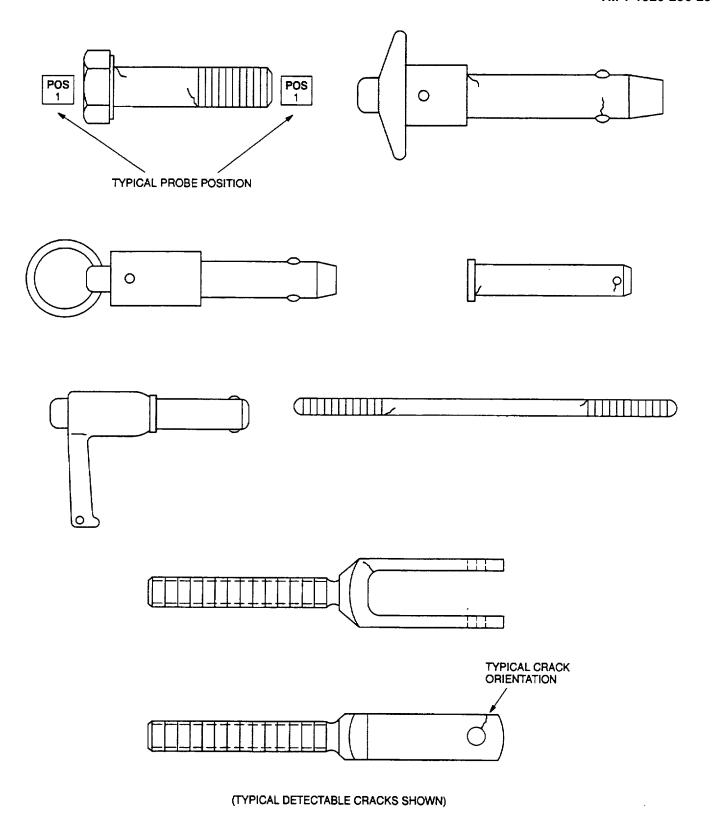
Bolts, Rod Ends, Turnbuckles, Rods, and Pins
